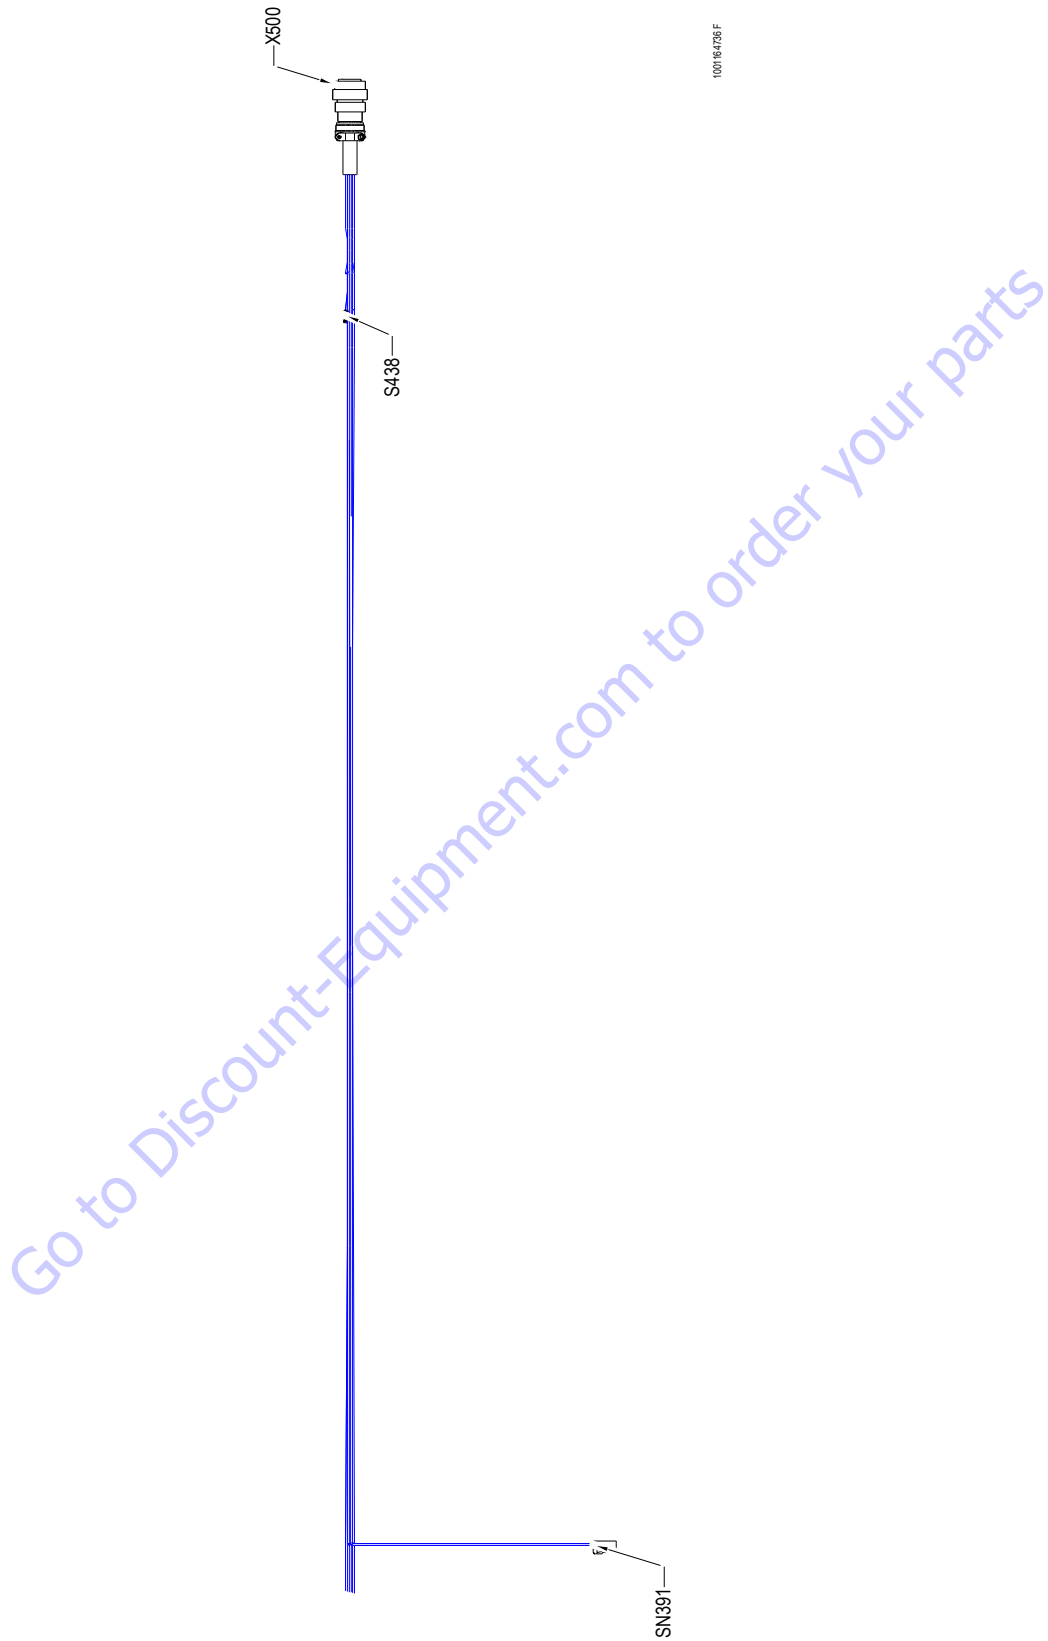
Main Valve Harness - Sheet 5 of 8
